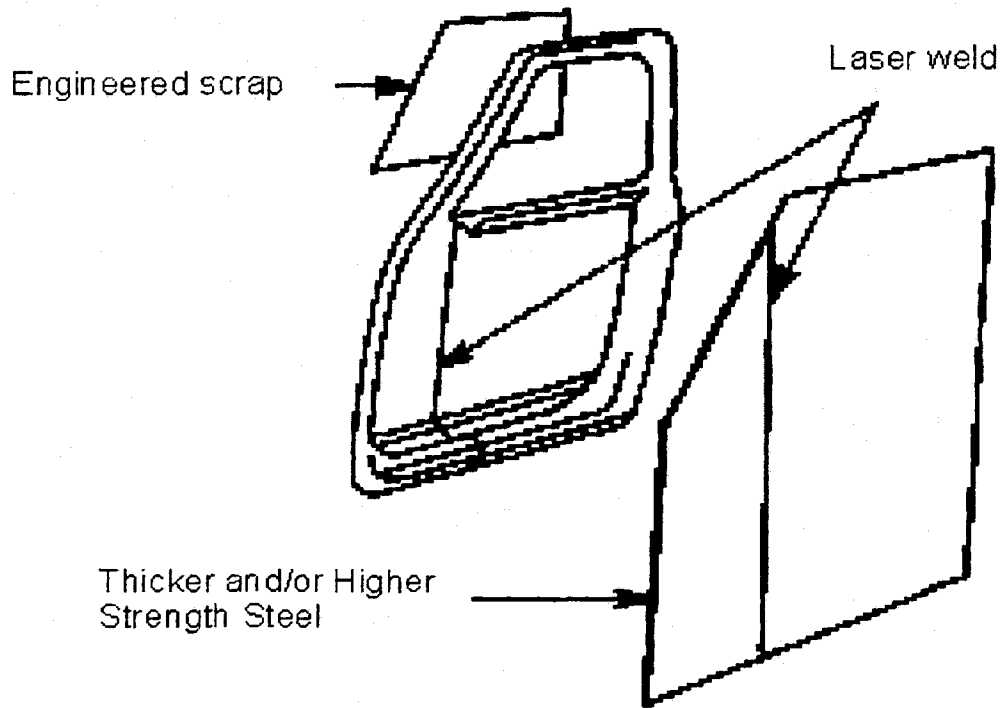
A door-inner panel stamped from a tailor welded blank.
